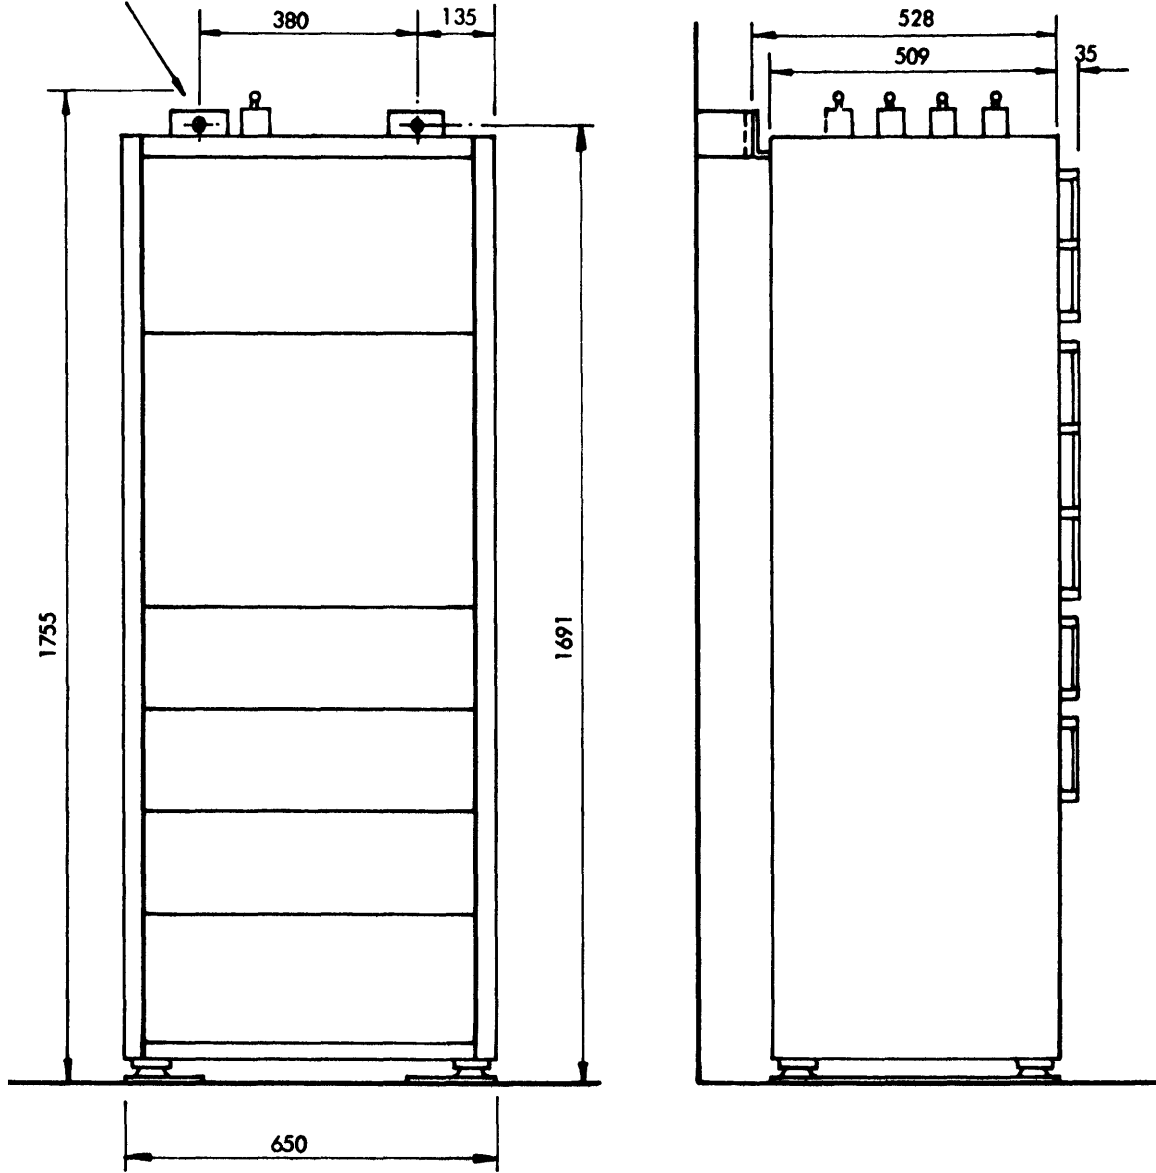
OUTLINE DIMENSIONS - Transmitter Cabinet
